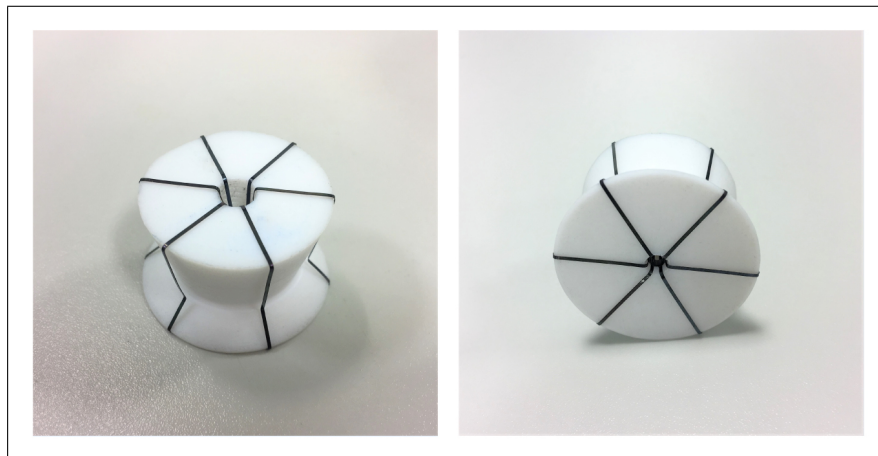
PTFE mold designed for fully coating of occluder frame.
